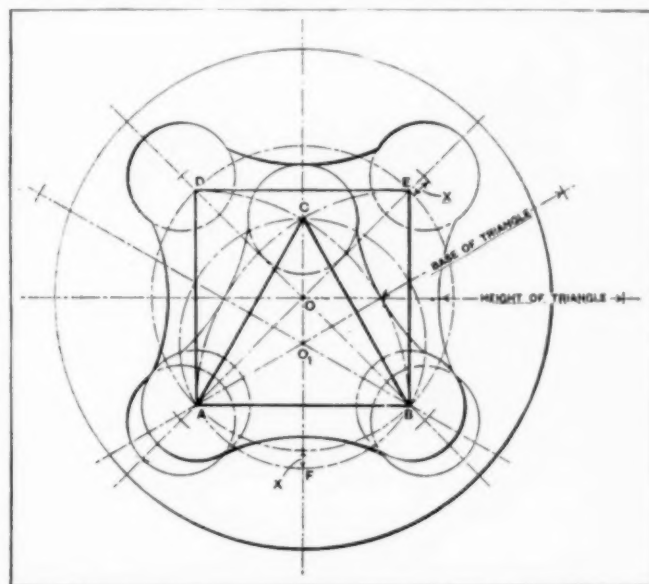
GEOMETRICAL CONSTRUCTION OF DESIGN
